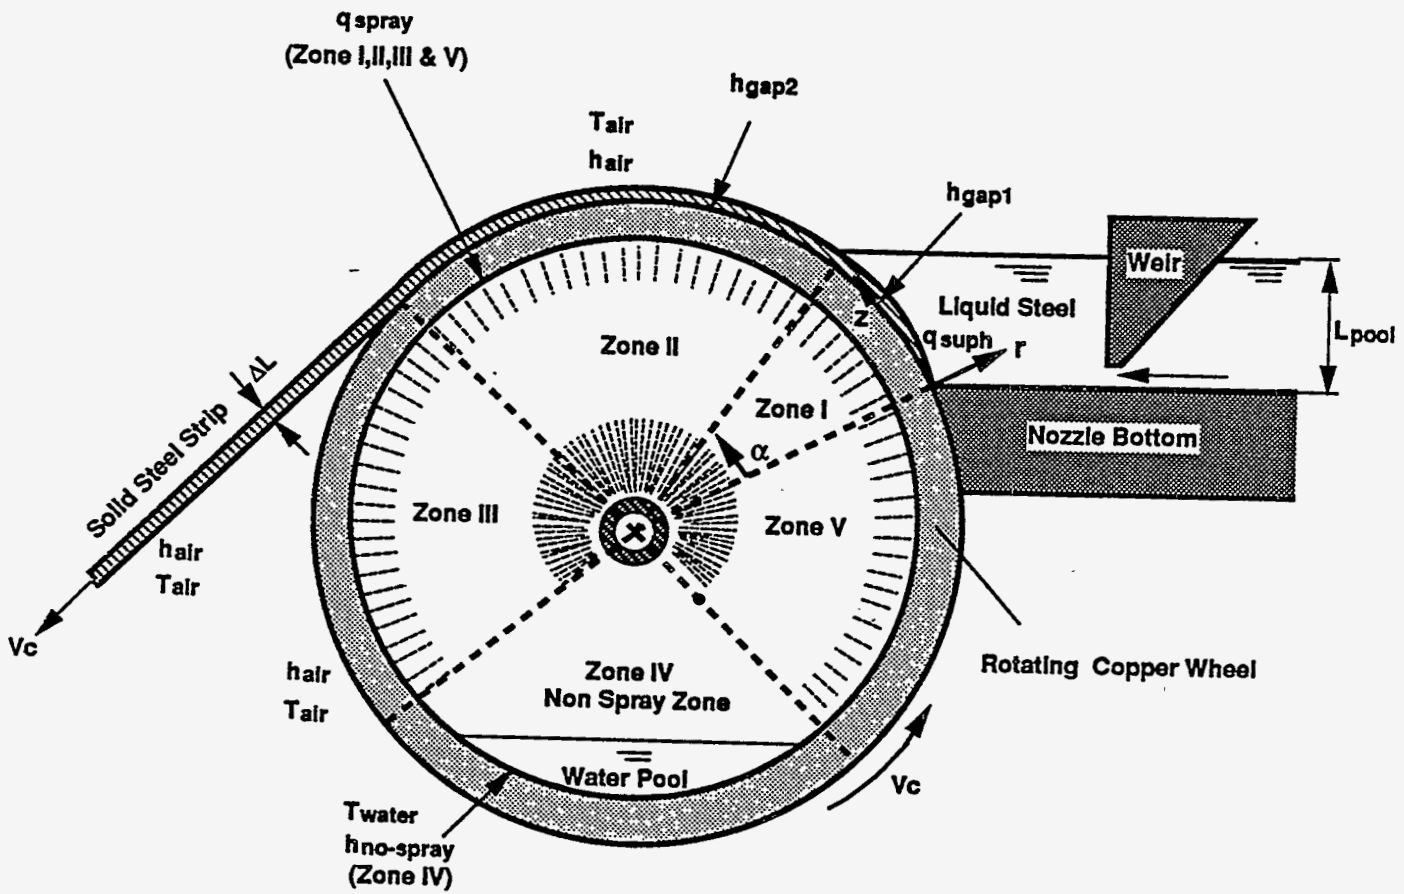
Schematic of Single-wheel Thin Strip Casting process
